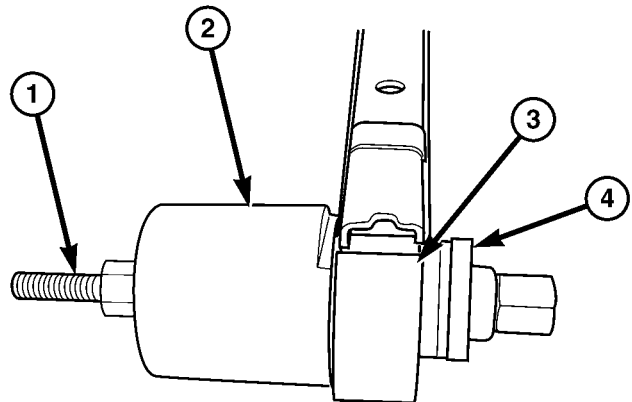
LOWER SUSPENSION ARM BUSHING REMOVAL
